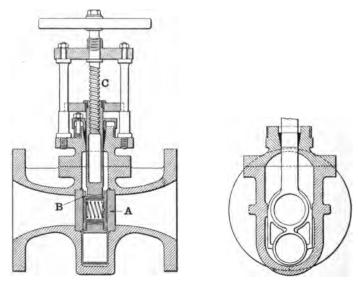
Hopkinson-Ferranti patent stop valve.
